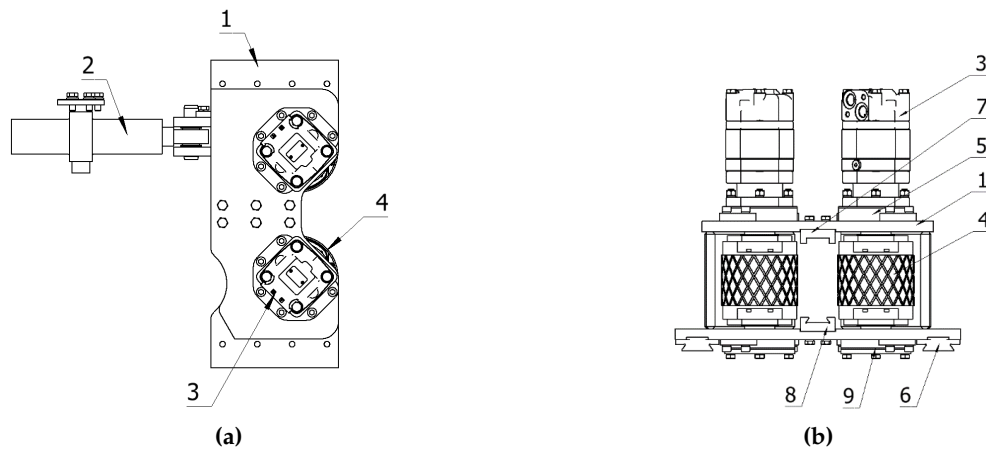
Structural diagram of spin buckle mechanism.1.support base;2.counterclamp cylinder;3.swinging clamp motor;4.swinging clamp roller;5.motor seat;6.slider;7.clamping clamp upper rail;8.lower seat plate;9.clamping clamp lower rail.
